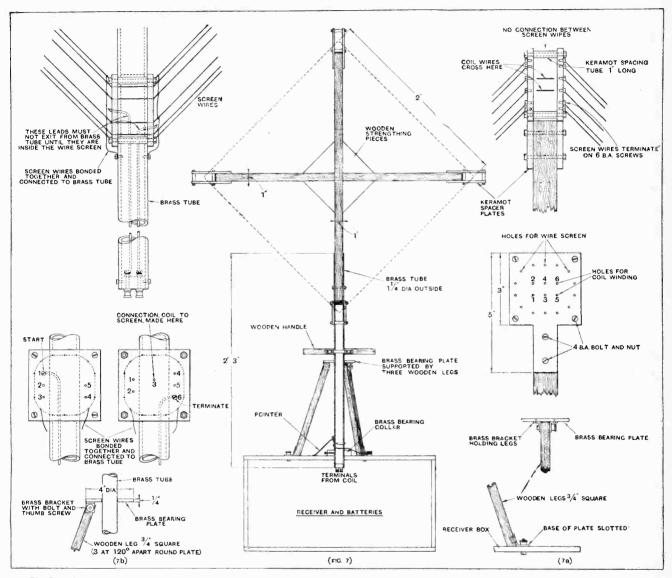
Dimensioned drawing of framework and support for direction finder, with details of component parts. (a) Shows the arrangement of the spacer plates and wires at the top of the coil. (b) Shows the corresponding arrangement at the bottom of the coil, with the method of leading the coil connections down the brass tube to the terminals inside the box.
